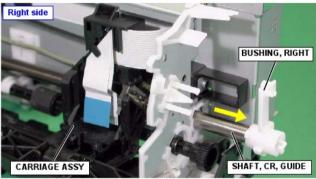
SHAFT, CR, GUIDE Removal 2
